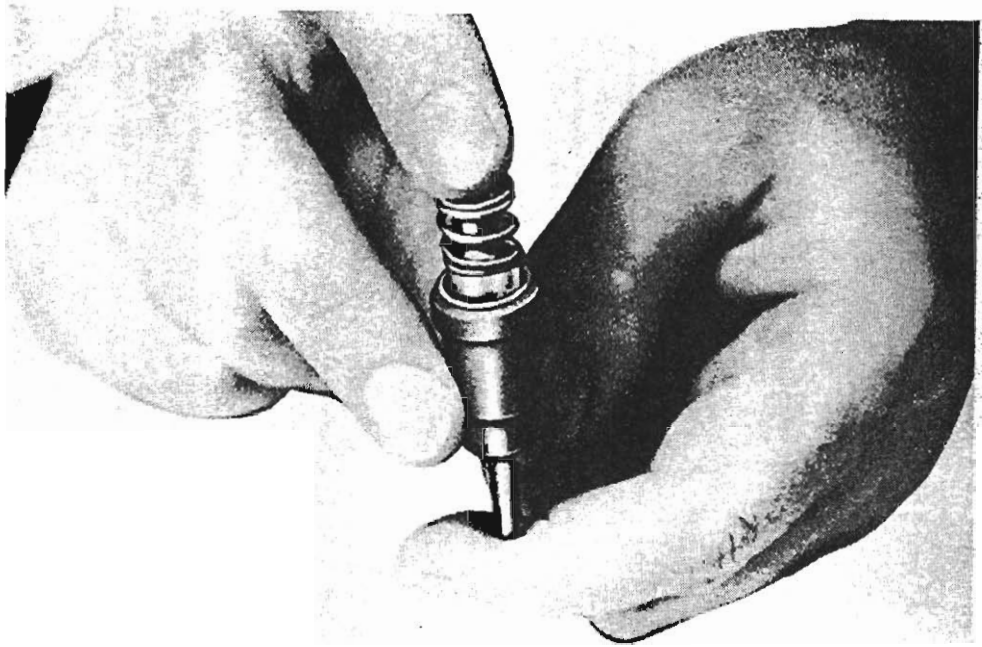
Place a Finger Over the End of the Oil Inlet Tube, Depress the Plunger and Release It Quickly.
